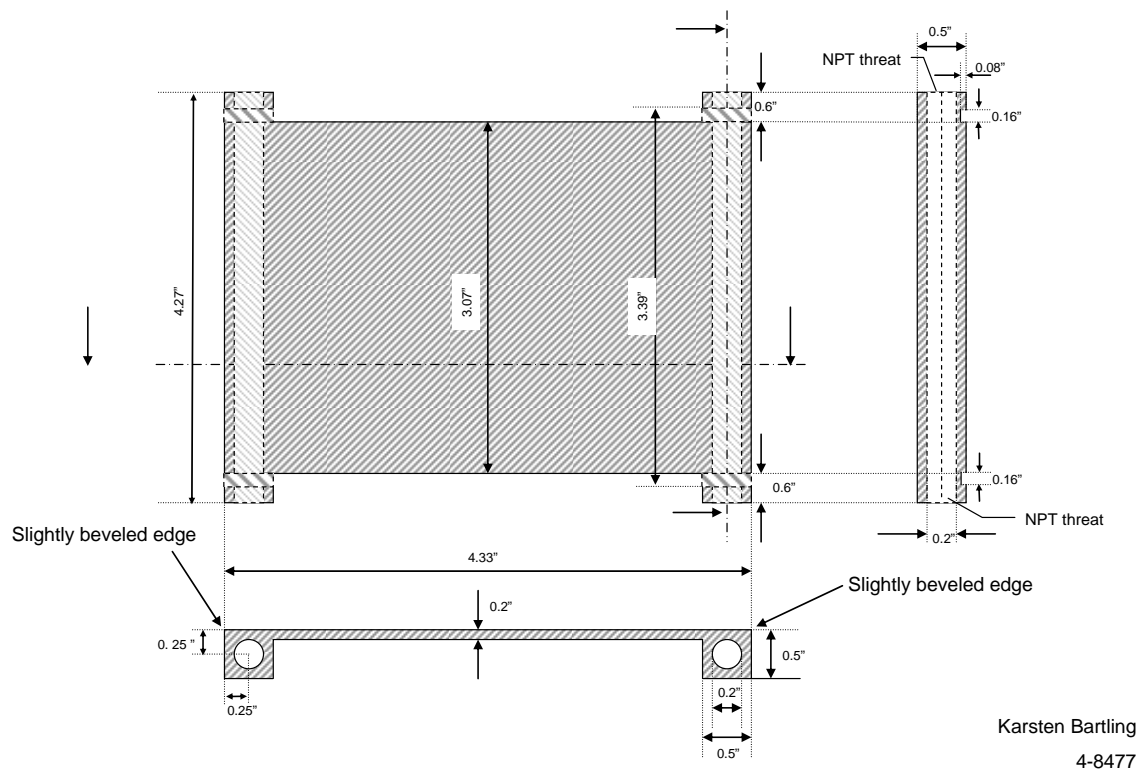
Technical drawing of modified thermal gradient plate (dimensions in inch)
